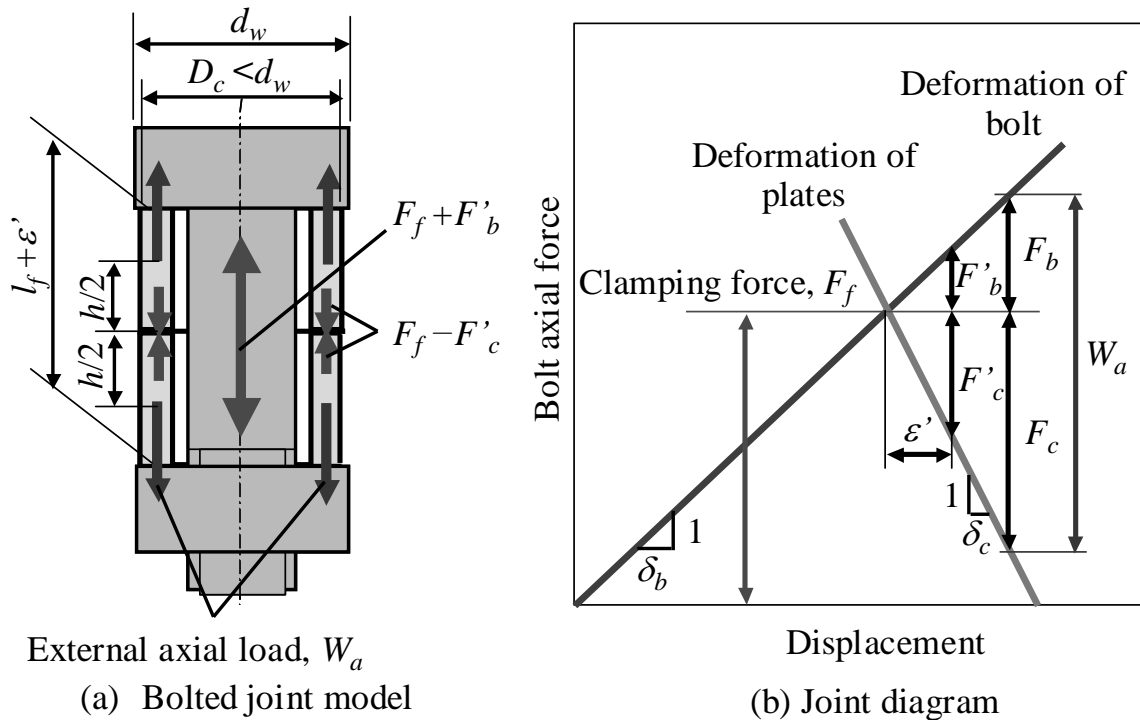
Bolted joint with axial load between bearing surface and plates contact surface
